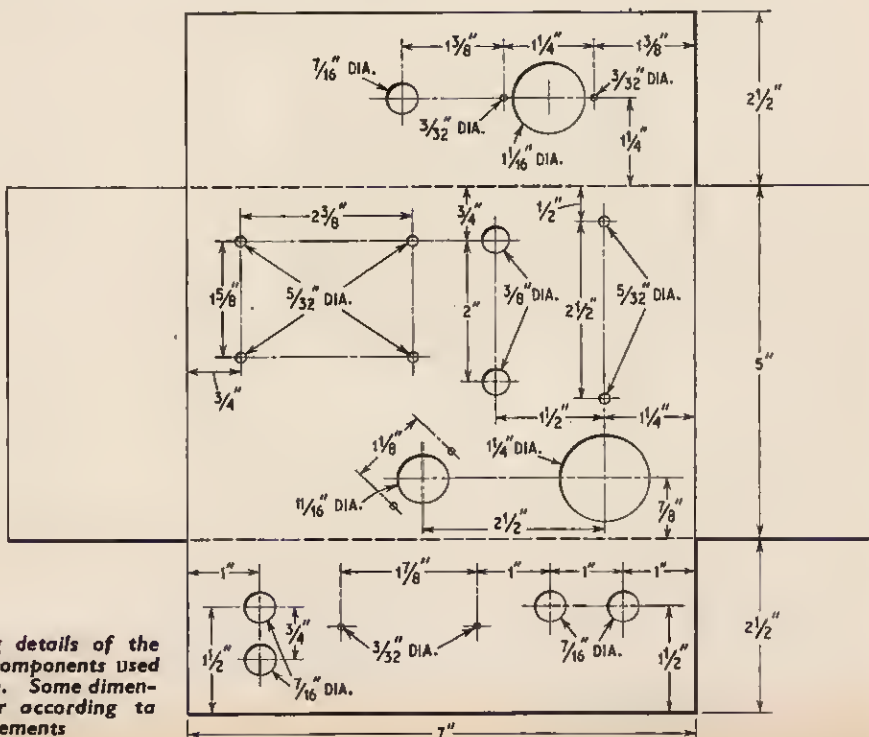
Drilling details of the chassis for the components used in the prototype. Some dimensions may differ according to individual requirements
